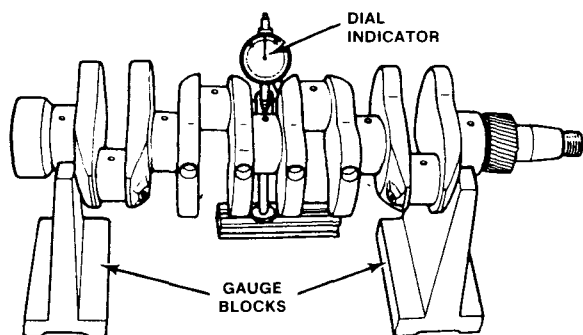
Checking Alignment of Main and Connecting Rod Bearing Journals
